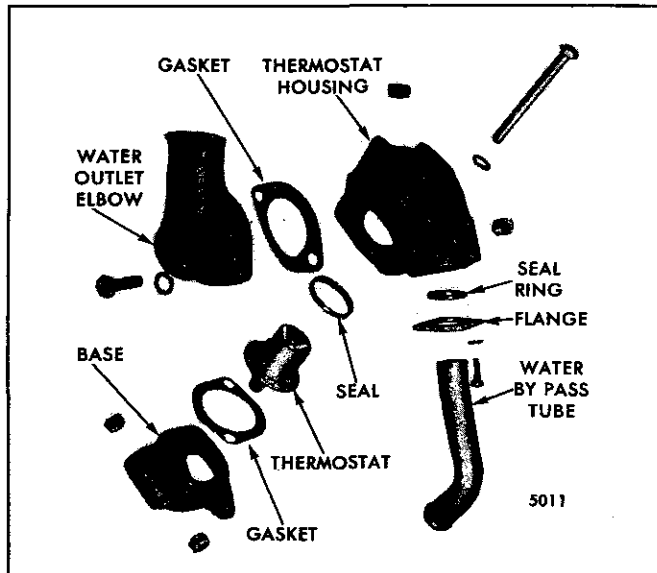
Thermostat Housing Details and Relative Location of Parts (V-Type Engine)
